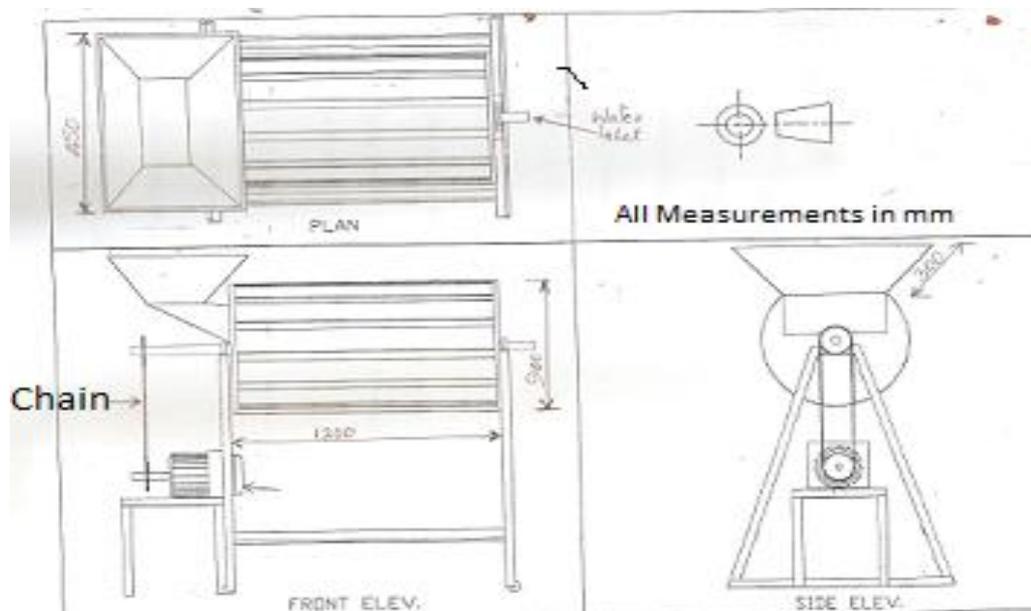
Orthographic View of Modified Cassava Peeling Machine
